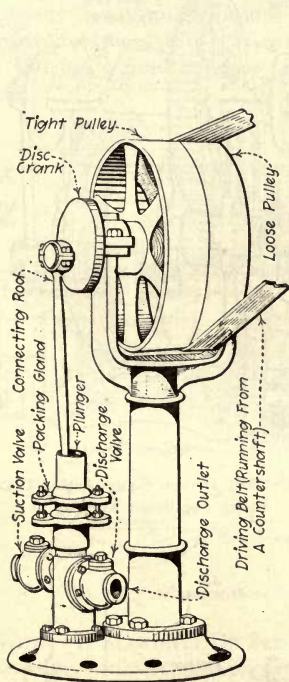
A Belt-Driven Single-Acting Pump For Boiler-Feeding.
